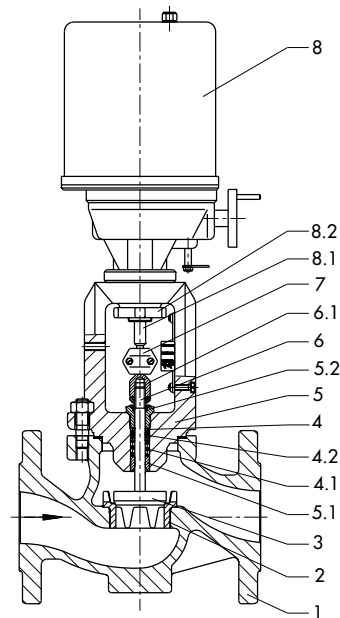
· Type 241-2 Electric Control Valve with Type SAM Electric Actuator on Type 241 Type Globe Valve (nominal sizes 1/2" to 10")
